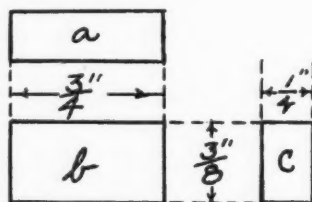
Drawing of steel block. *a*, Top view; *b*, side view; *c*, end view.
